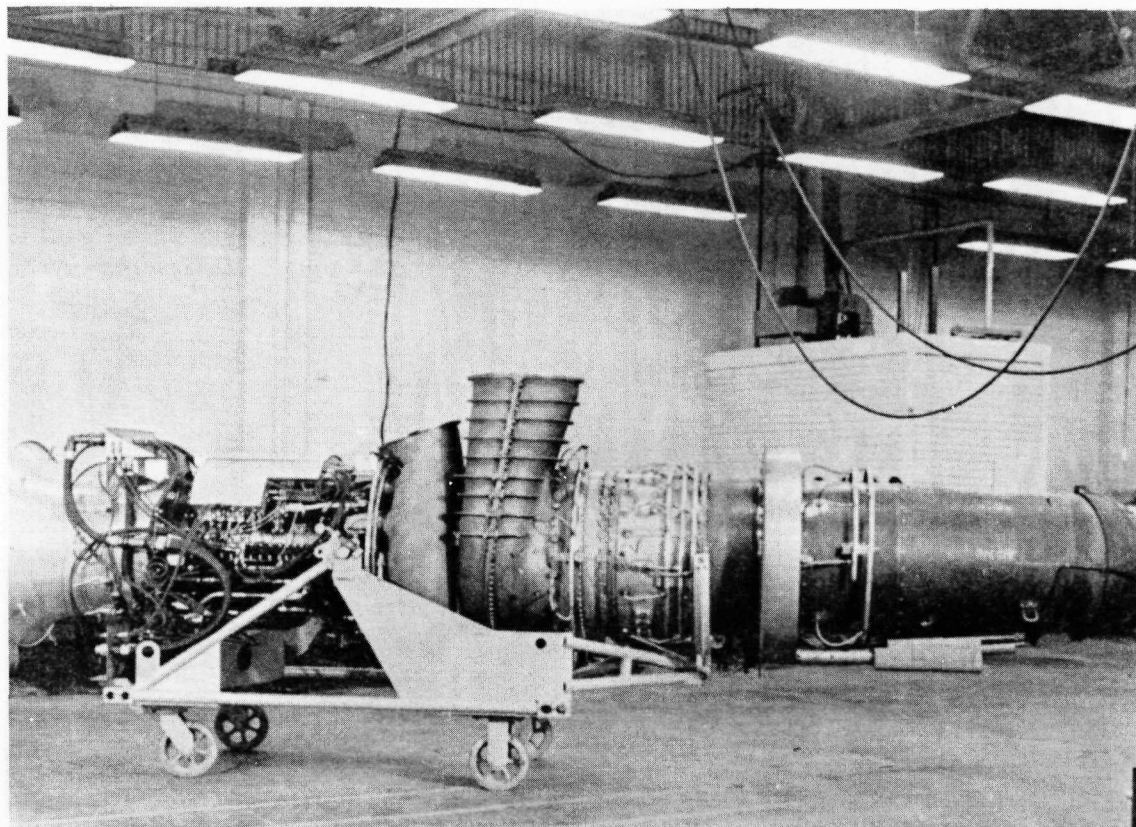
X39-5 engine ready for assembly onto HTRE No. 3 dolly (U35156C)
